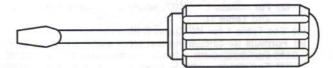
TYPICAL APPEARANCE OF A CUSHION GRIP SCREWDRIVER
